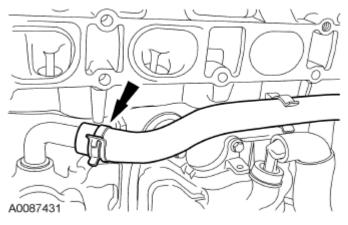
Locating Coolant Bypass Hose Courtesy of FORD MOTOR CO.
